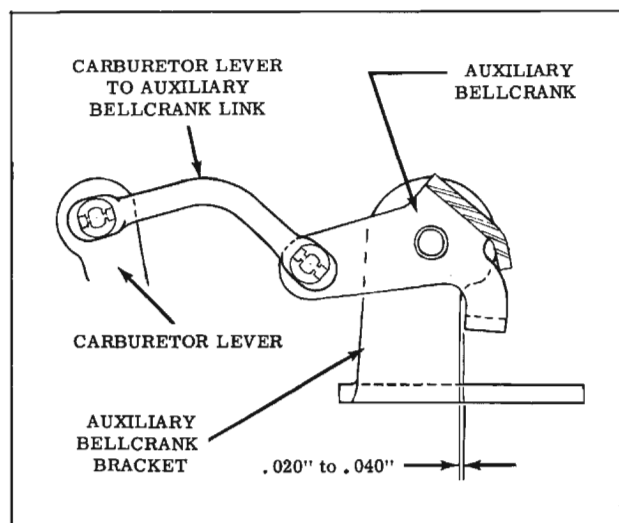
Carburetor Lever to Auxiliary Bellcrank Adjustment (2 Barrel)
